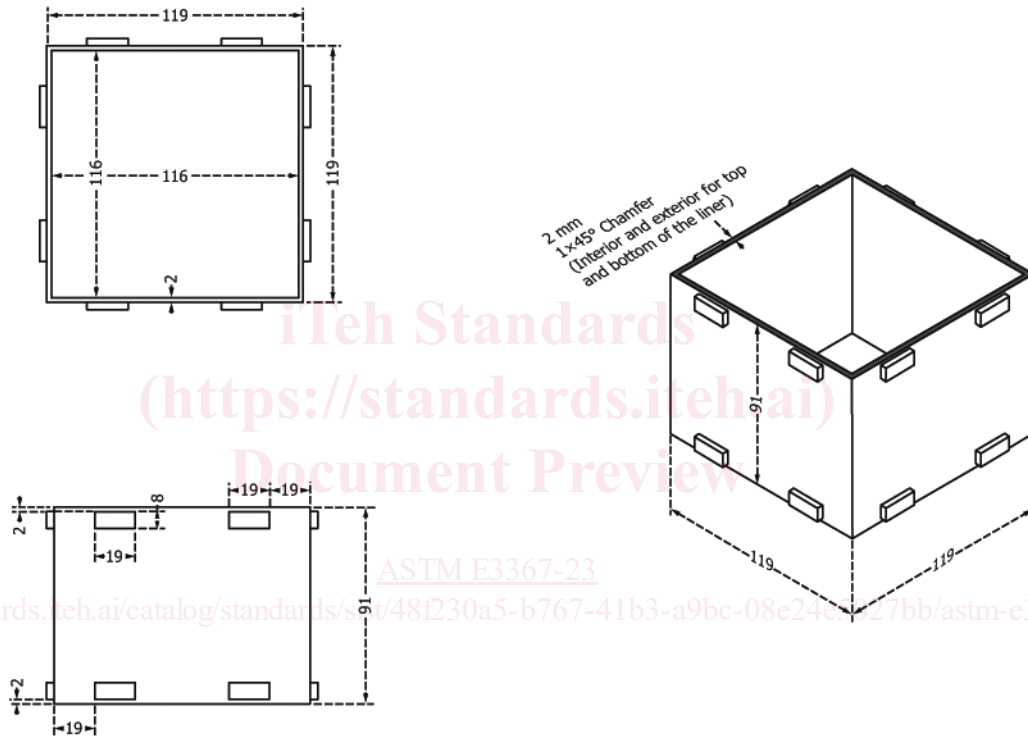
Bottom Retainer Frame – Par 1 (Stainless Steel)
